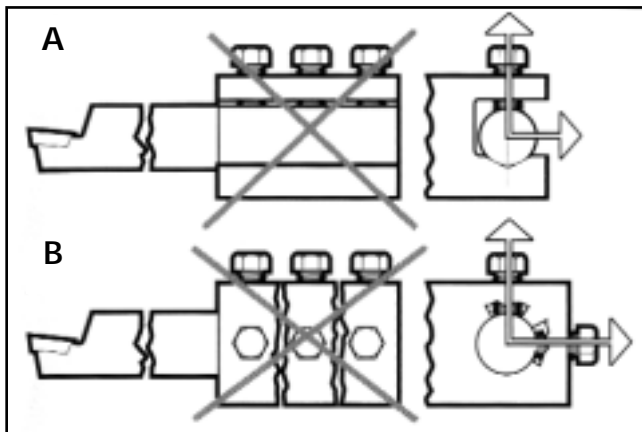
A) Setscrews and a V-block hold the boring bar. B) Setscrews hold the boring bar in a cylindrical bore, which is the worst possible method.
